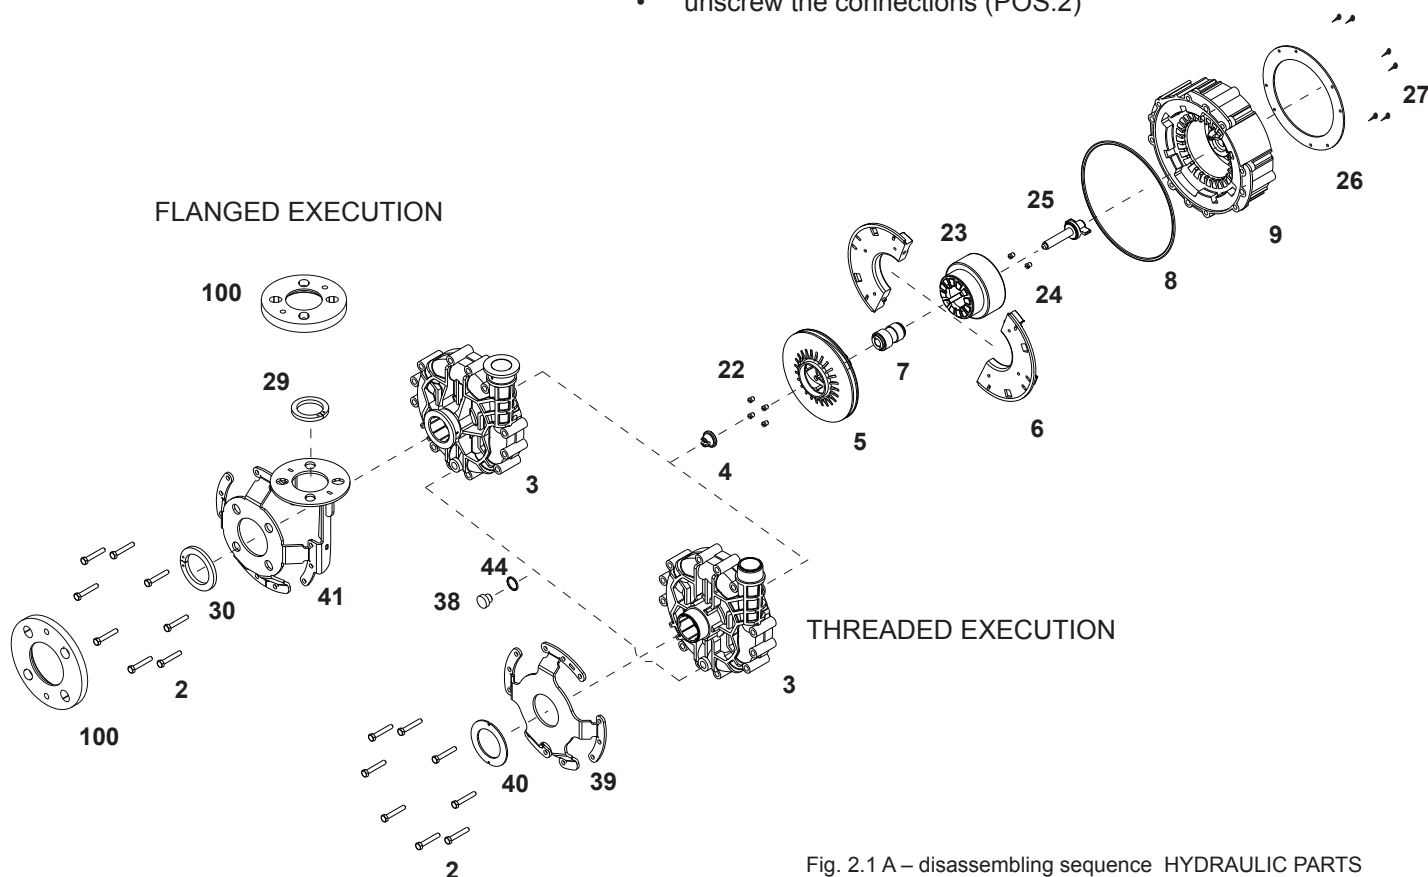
A – disassembling sequence HYDRAULIC PARTS
